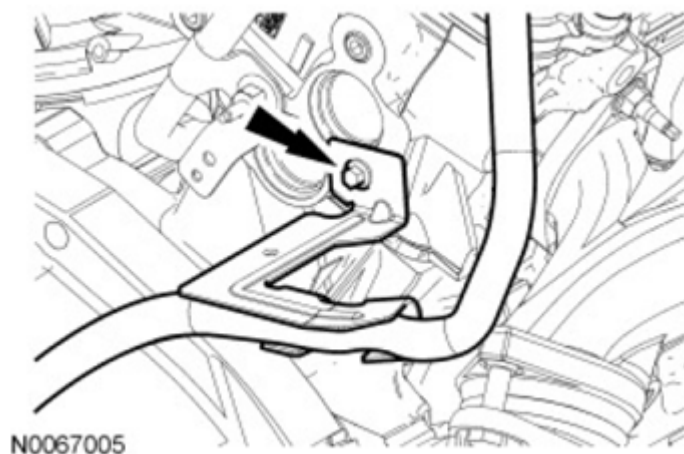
Locating Transmission Wiring Harness Support Bracket
